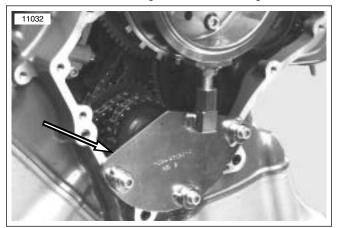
Install Large Plate of Tool to Cam Drive Side of Engine
